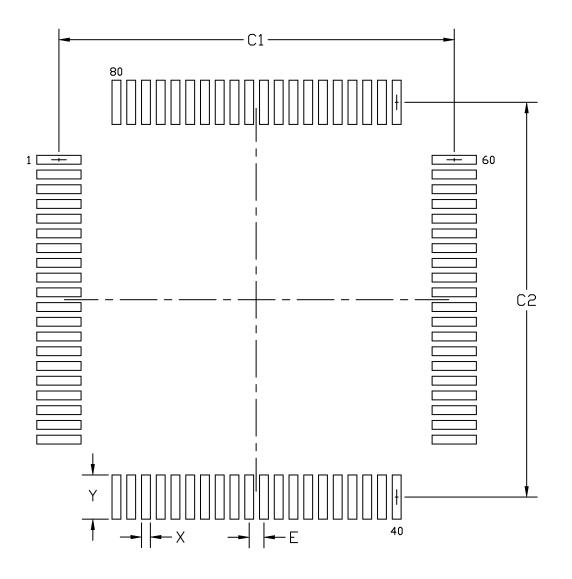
TQFP80 PCB Land Pattern Drawing
